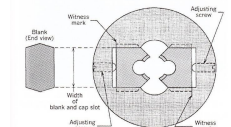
Setting the die position to the witness marks on the die and collet assembly (TRW, Inc.)
